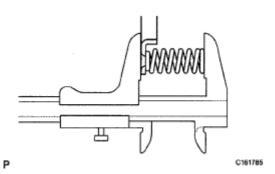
Measuring Free Length Of Spring With Spring Seat
